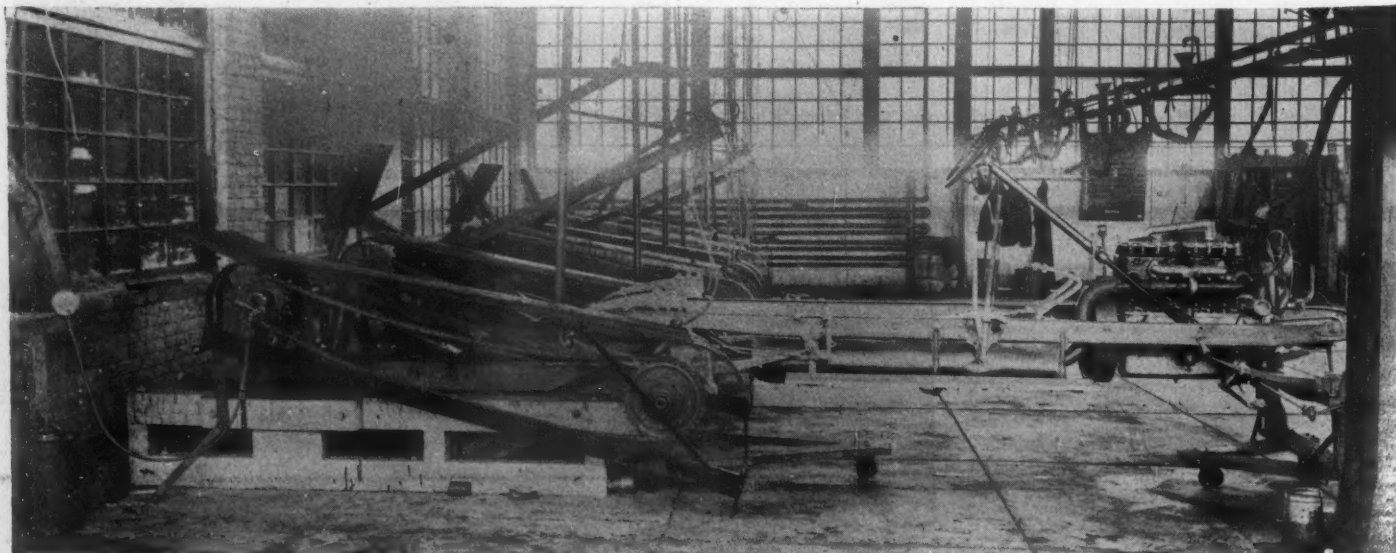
FAN DYNAMOMETERS USED IN TESTING THE INTER-STATE CHASSIS
